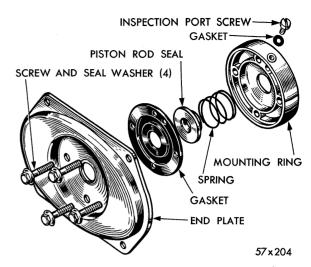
Removal of Mounting Ring, Seal and Washer
